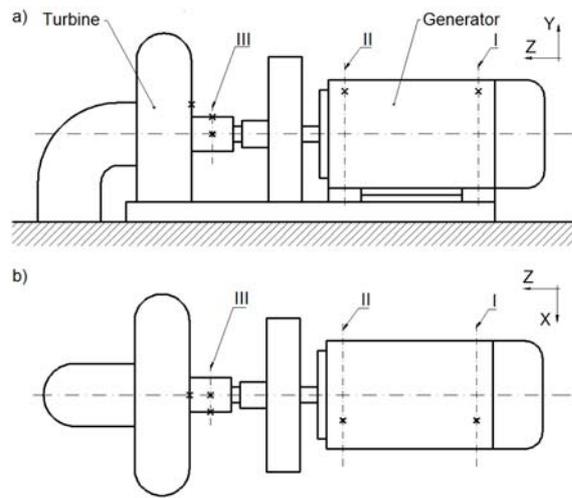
Turbine set scheme with measuring points (a – side view, b – top view).
